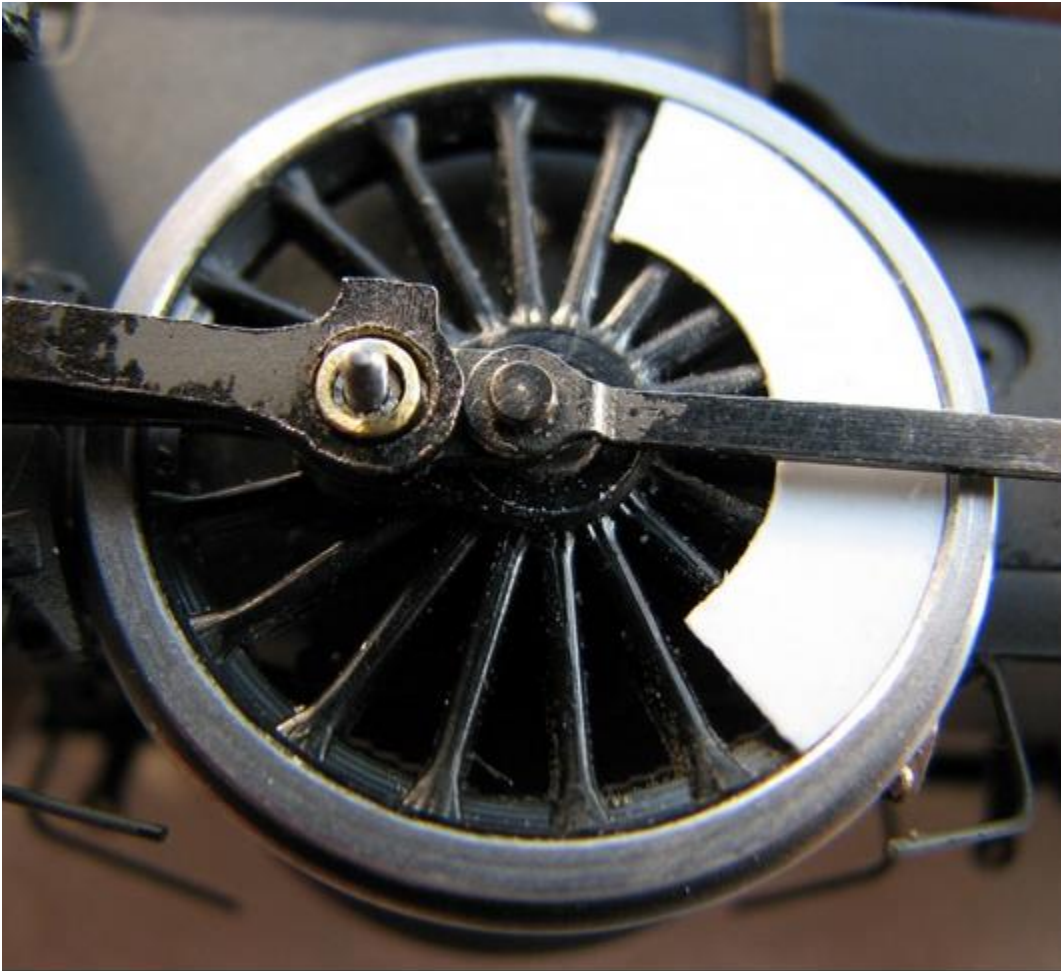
Shows the rod and bush assembled over the centre crankpin, but first we need to fasten the return crank to the valve gear.
